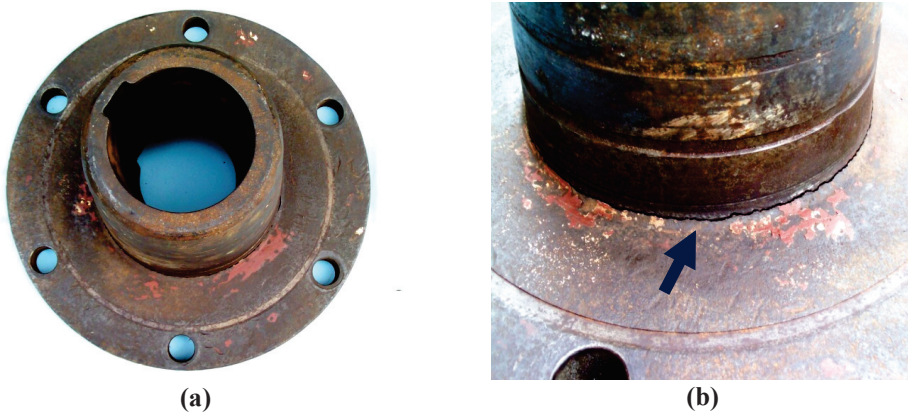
General appearance of the (a) failed shaft coupling and (b) its failure spot.
